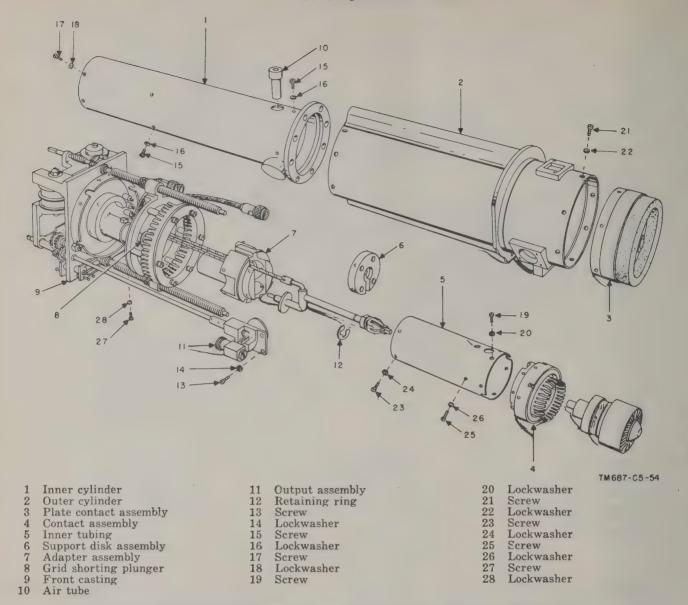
(Added) Transmitter D-band rf tuner, power amplifier, exploded view.
